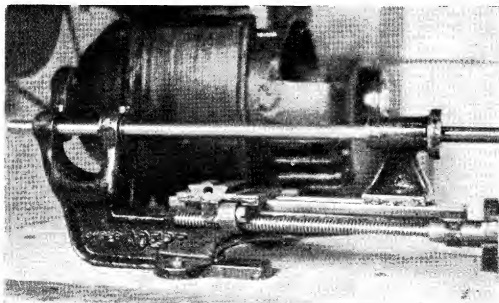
Aligning the tailstock by means of a bar passed through the mandrel bearings and tailstock casting
